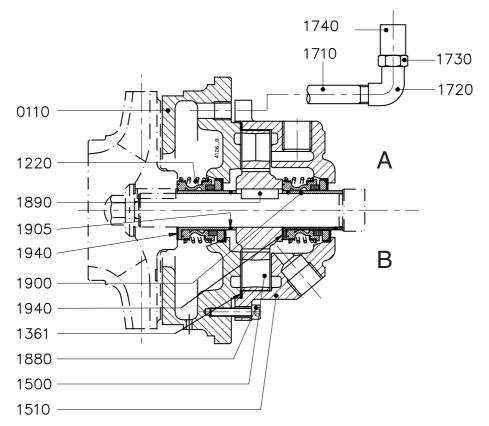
Parts of shaft sealing group M2 (A = bearing group 1 and 2, B = bearing group 3).
